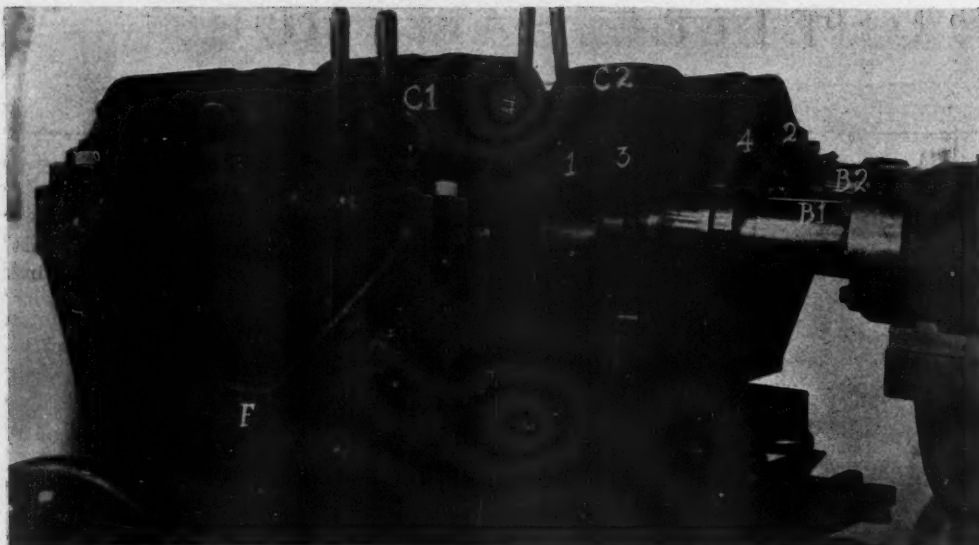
TWO-SPINDLE HEAD GRINDER WORKING ON FOUR TWIN CYLINDERS
